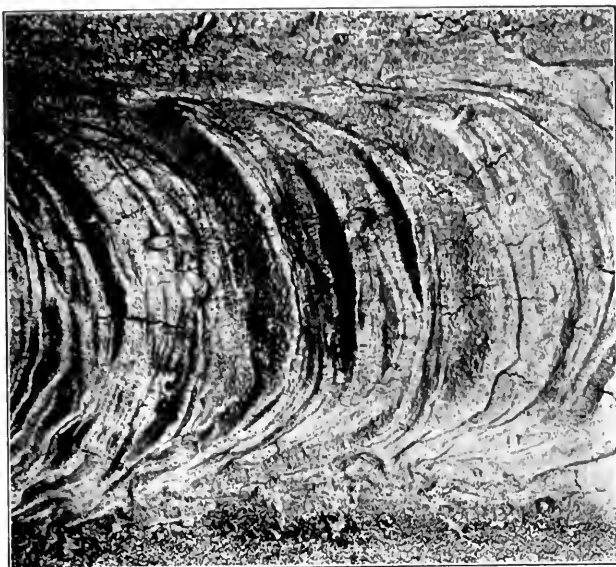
CRACKS IN WELD AND PLATE AFTER 50,000-LB. TENSILE LOAD FAILED TO BREAK TEST PIECE. SCALE PICKLED OFF BEFORE TAKING PHOTO; MAGNIFICATION 3.6
